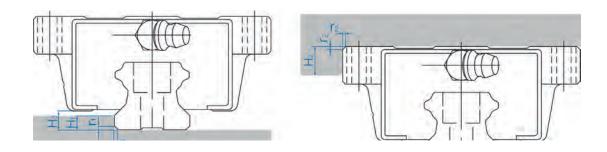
DIMENSIONAL TOLERANCE BETWEEN CONTACT DATUM PLANE AND MOUNTING HOLE
